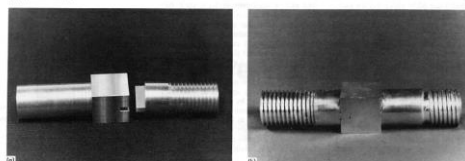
Tongue-and-groove joint using interference fit with ribbed tongue to create cold weld. (a) Before welding. (b) After welding.
